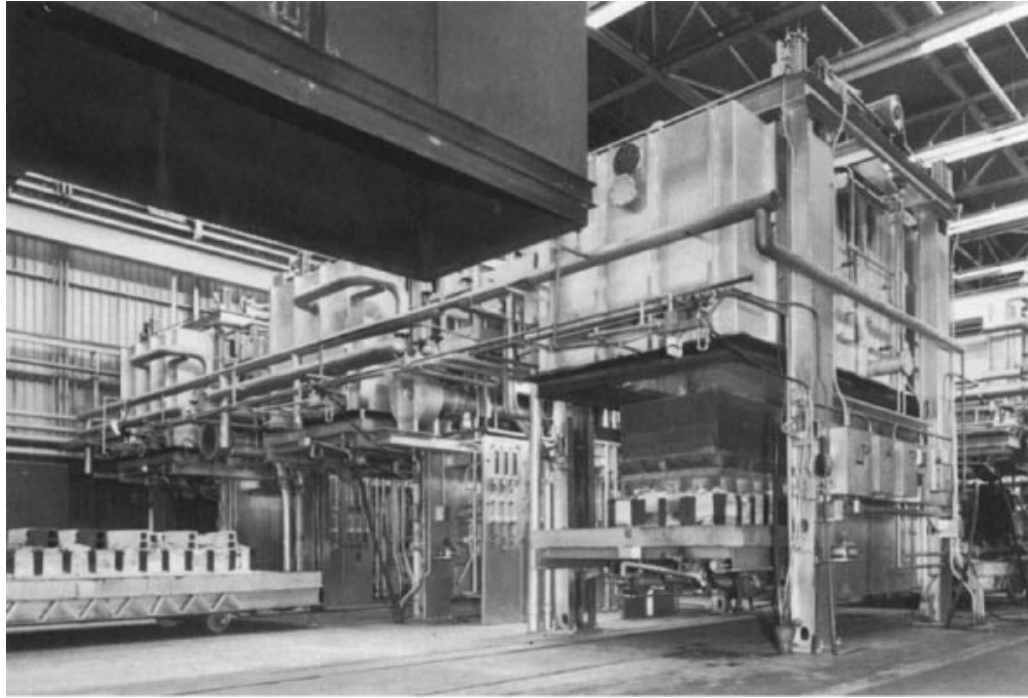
Elevator furnace. Courtesy of Wellman Furnaces, Inc.
